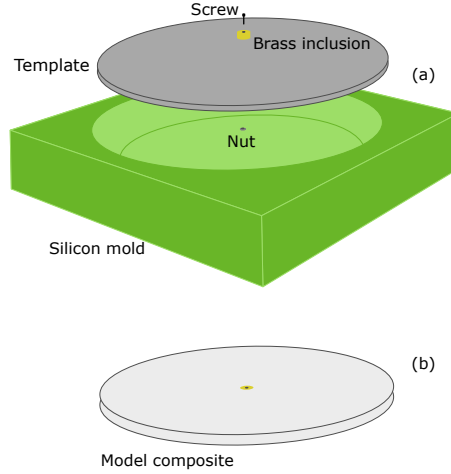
Model composite manufacturing: (a) assembly used for the casting; (b) MCS after cure and dry.
